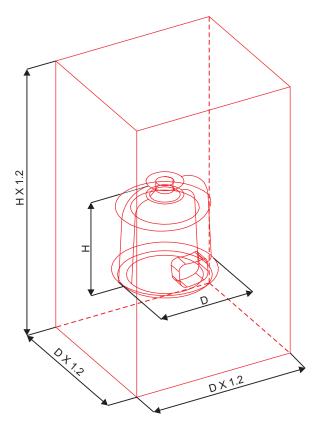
MOLDPREP >> WORKPIECE >> RECTANGULAR
